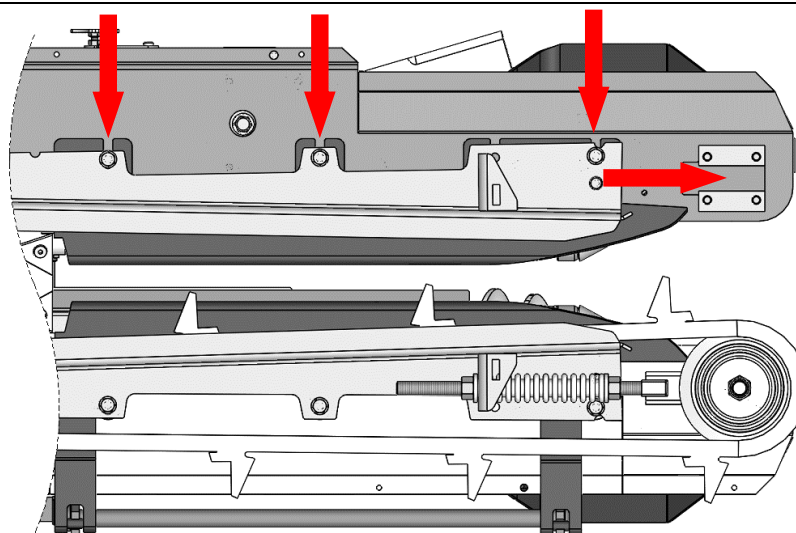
Install the sunflower kit, tighten the screws. Tighten the counter blade screws!
